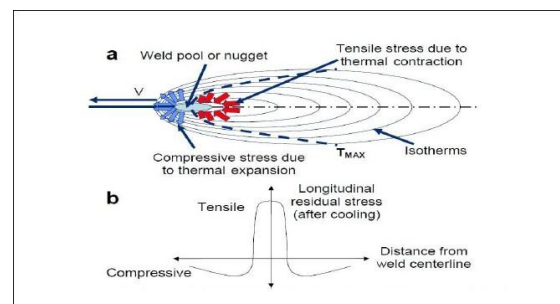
Stress in welds (a) thermal stress during & (b) residual stress after welding.
